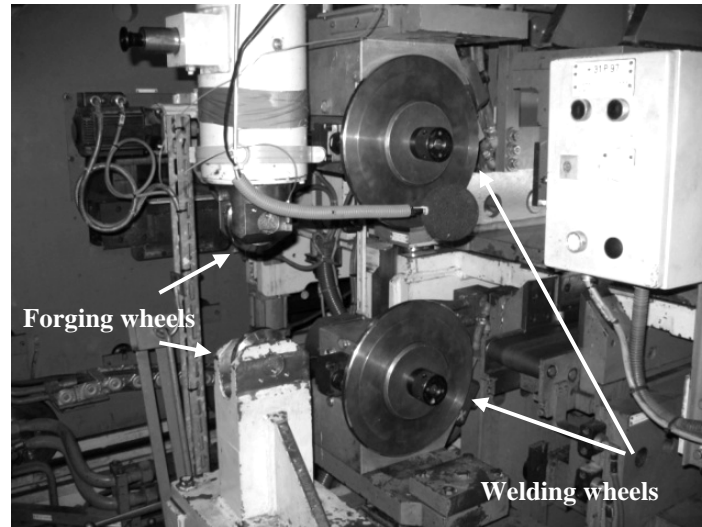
Location of the accelerometer on the forging wheel of the welding machine
